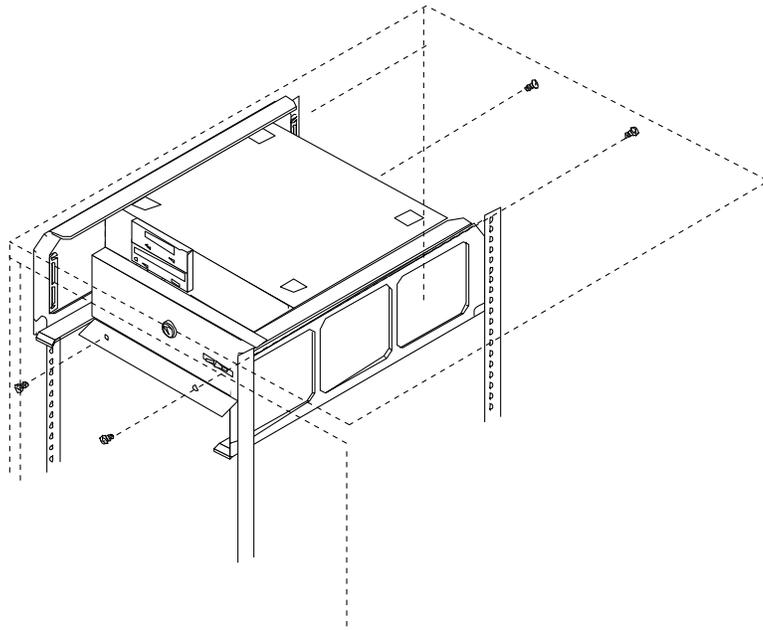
Installing Screws to Secure the Base Plate to the Side Brackets
